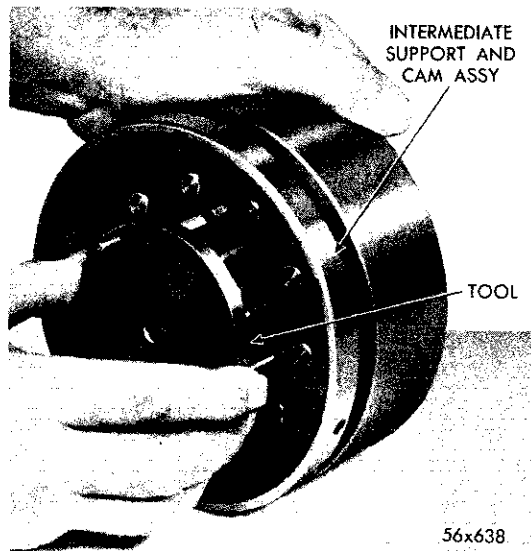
Installation of Tool X-3427 in Intermediate Support and Cam Assembly
